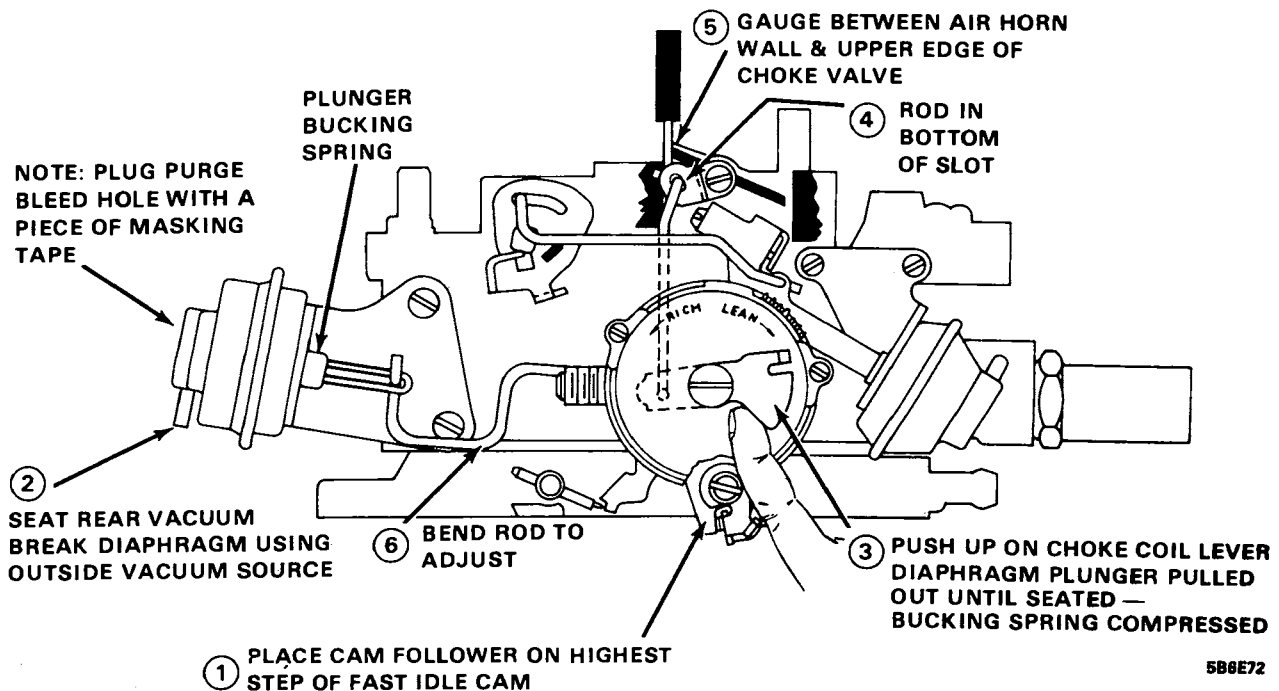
E-72 - Rear Vacuum Break Adjustment - All Except 400-4Bbl.
